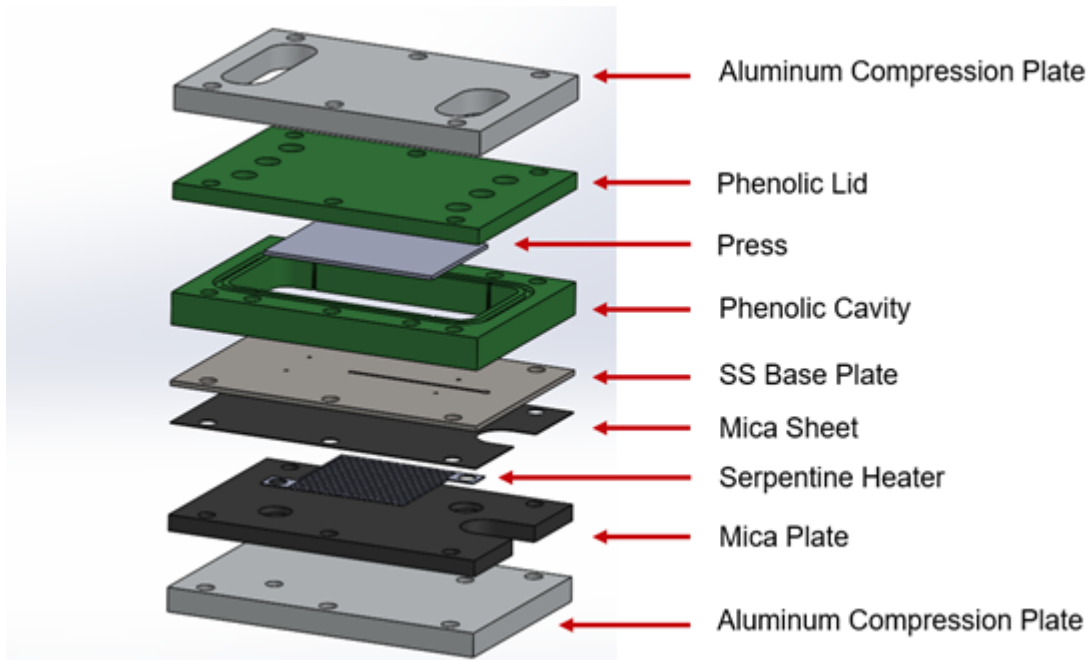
Exploded assembly of the heat sink fixture and test section. No fittings or hardware are shown.
